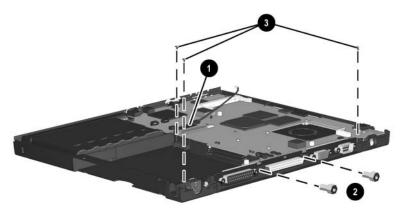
Removing the System Board Screws and Bushing Guides on an Evo Notebook N600c
